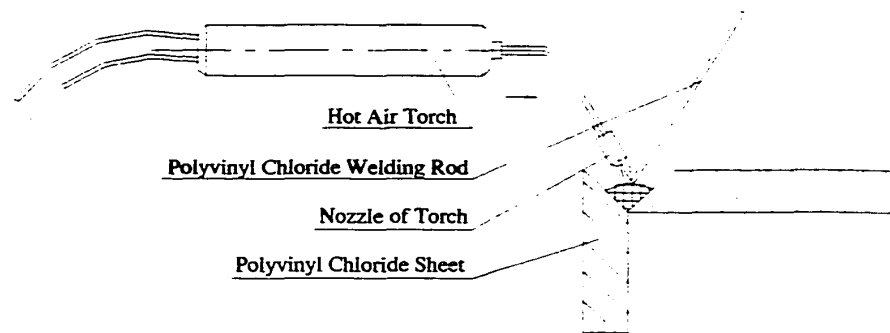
a depositing principle like the plastic welding.
